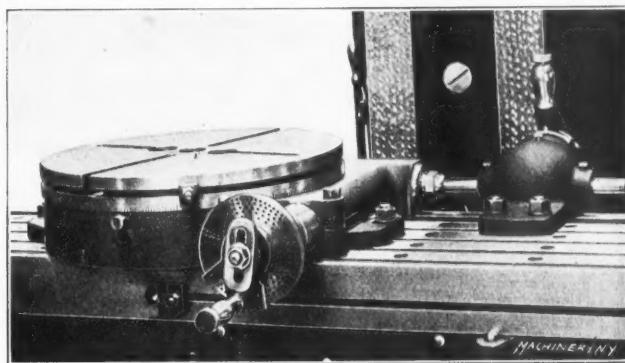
Circular Milling Attachment with Automatic Feed and Throw-out.
